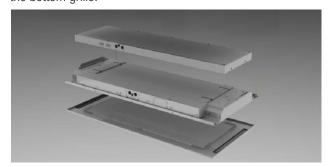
Partially exploded view of the VidaShield[™] System showing major components.
